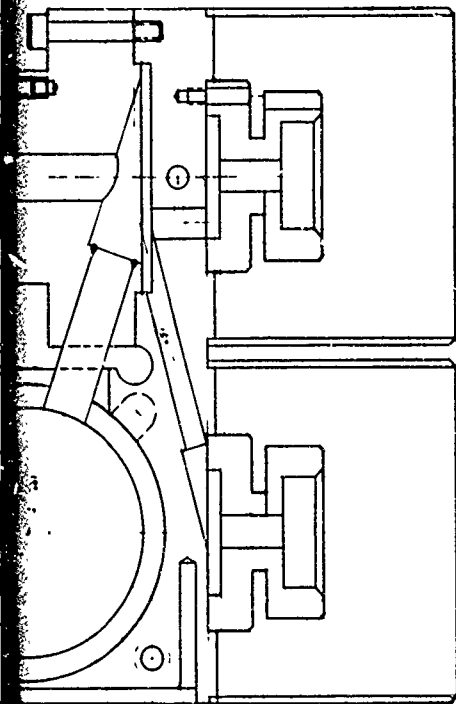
Dual Gyro, Single Pump E-Leam Welded to Inconel Adapter
